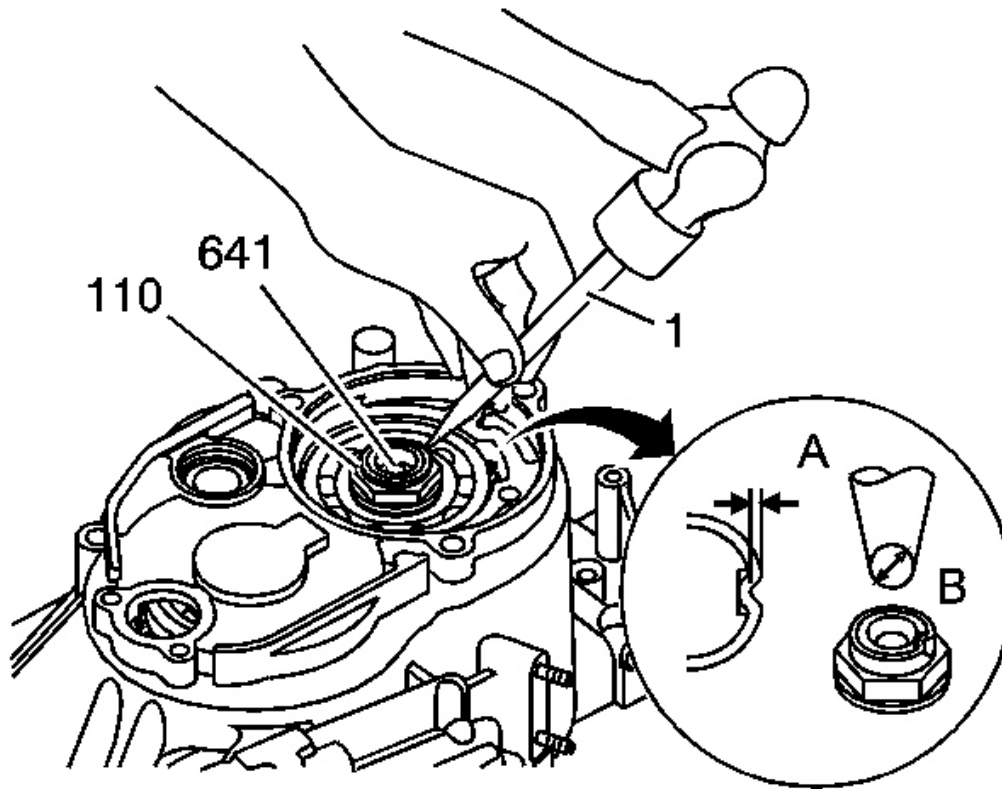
Staking The Mainshaft Nut Into Mainshaft Using A Punch
